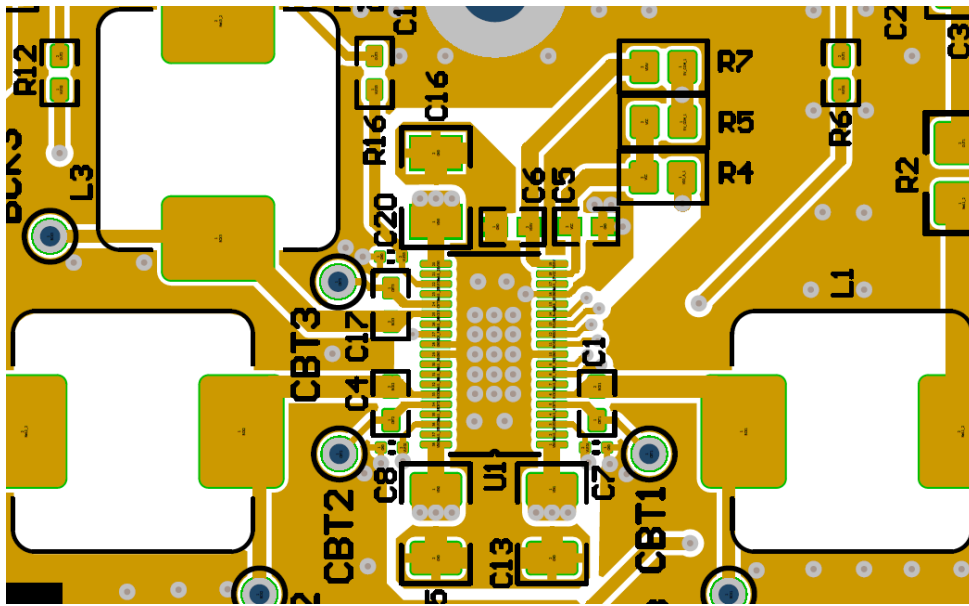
NCV78935 Bottom Side Exposed Pad Reference PCB Layout (Top View)
